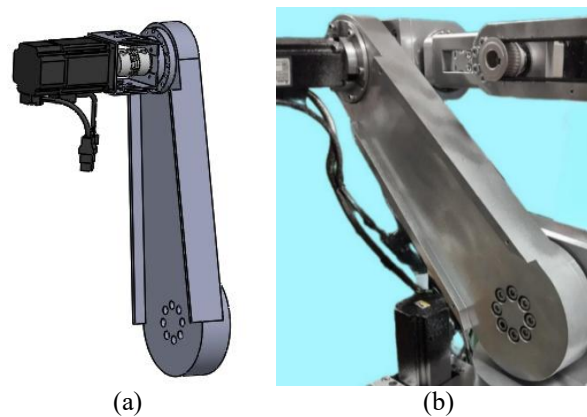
Mechanical design of Link 2 and Joint 3, (a) CAD design, and (b) The prototype
